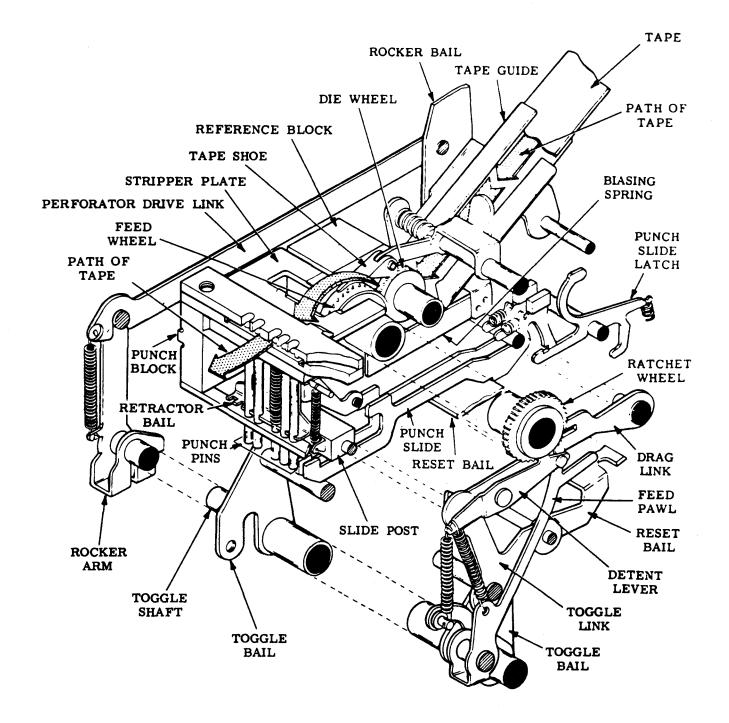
Perforating Mechanism - Chadless Tape Unit
